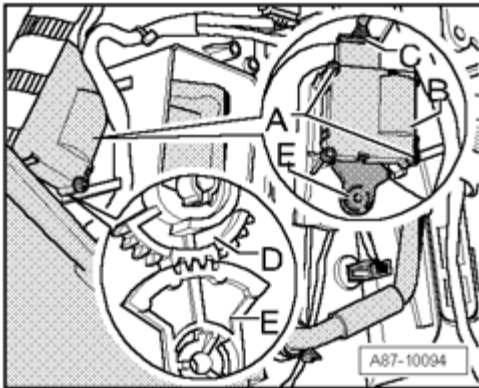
Identifying Connector, Bolts, Control Motor, And Connecting Element
